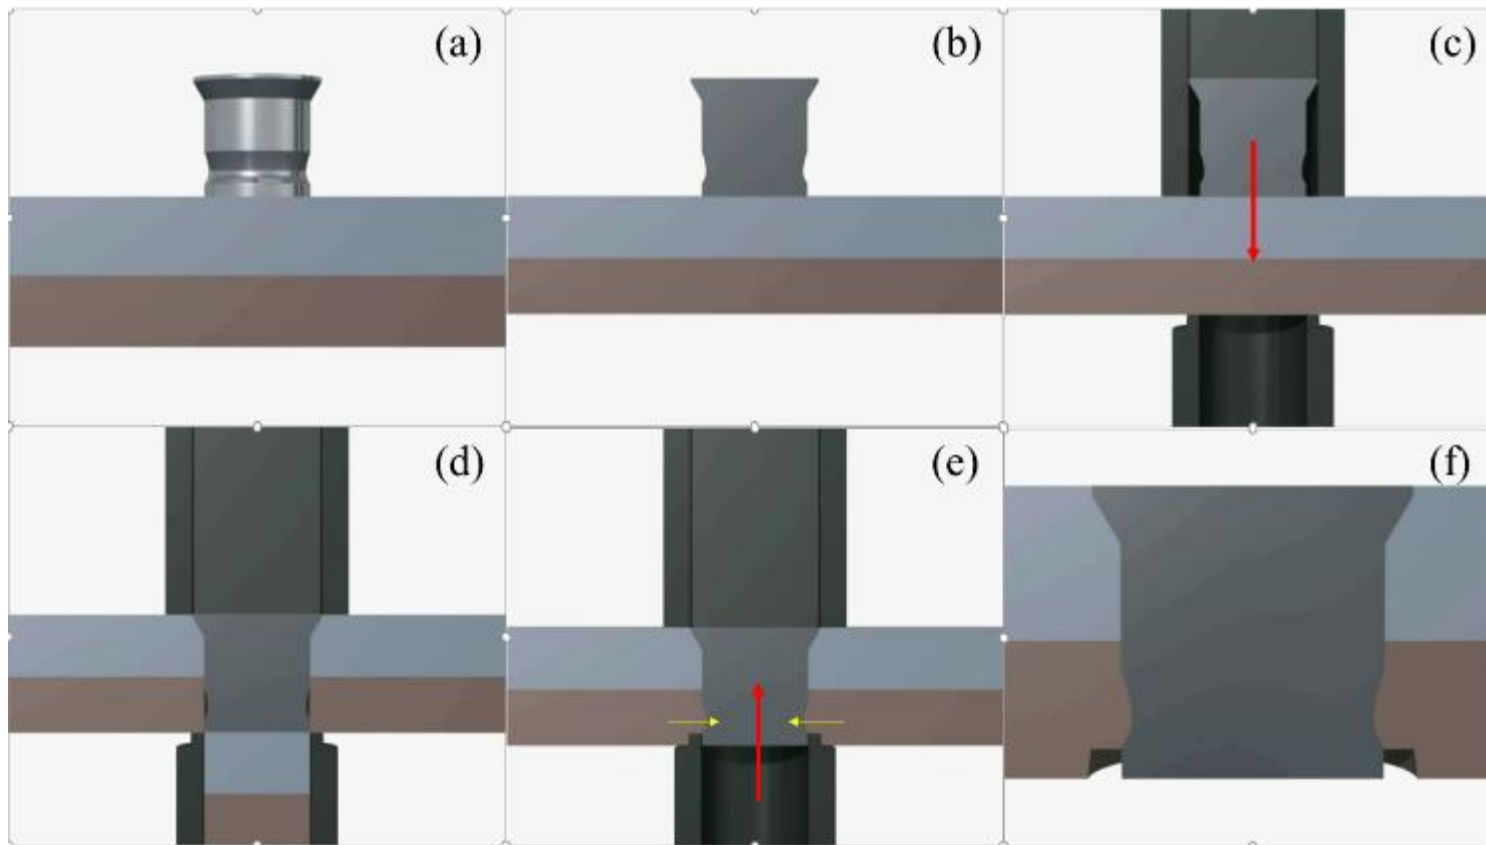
The Kerb Konus Tuk rivet process: rivet above top sheet (a,b), rivet punching through the top and bottom sheet (c), sheet material expulsion (d), die insertion at bottom sheet (e) and final joint (f).
